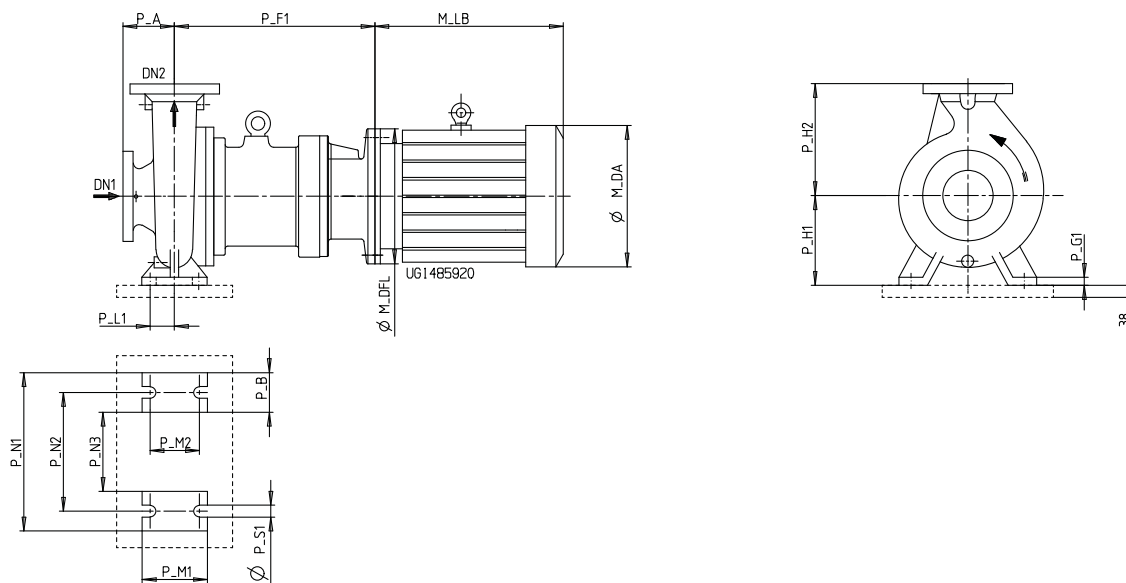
Dimensions for installation with site-supplied mounting plate (mounting plate is not included in KSB' scope of supply.)
